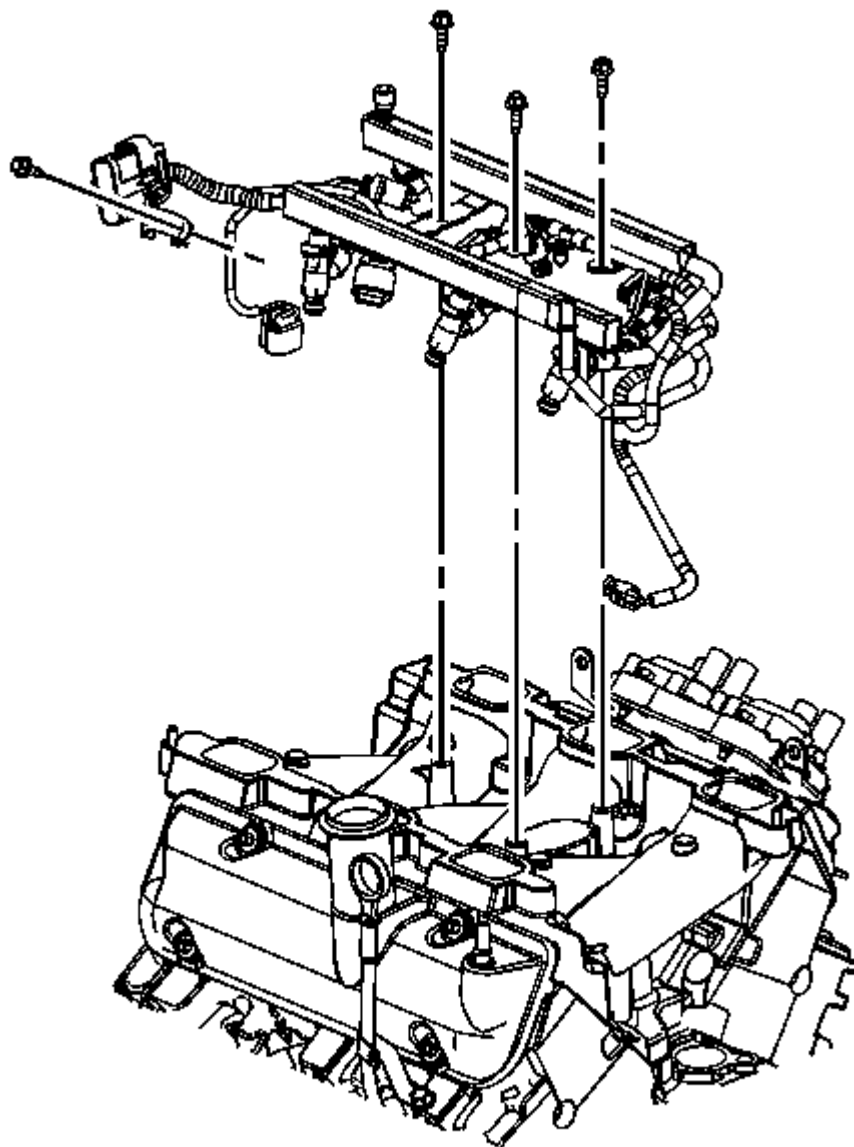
View Of Fuel Rail Assembly & Intake Manifold
